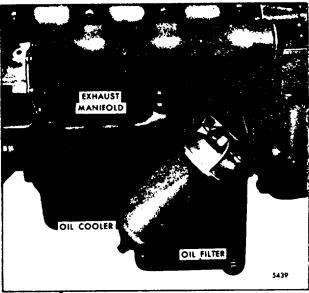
Typical Oil Cooler Mounting (6V-53 Engine Shown)
